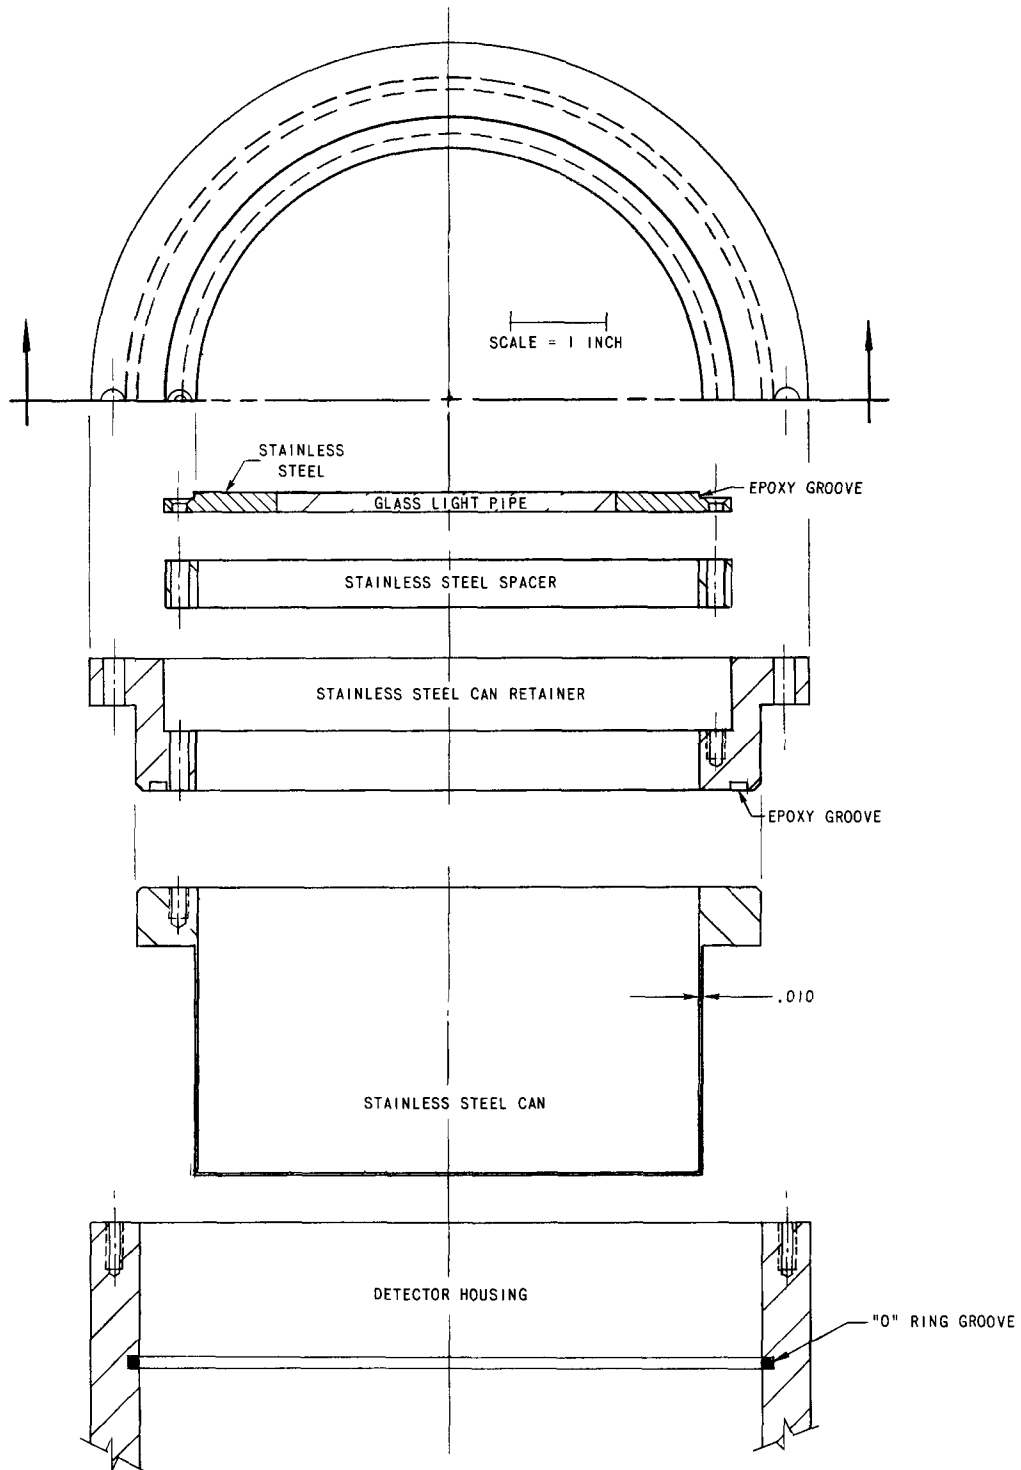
Exploded View of Detector Assembly for 4 x 5-in. NaI(Tl) Crystals Used in Liquid Counting
